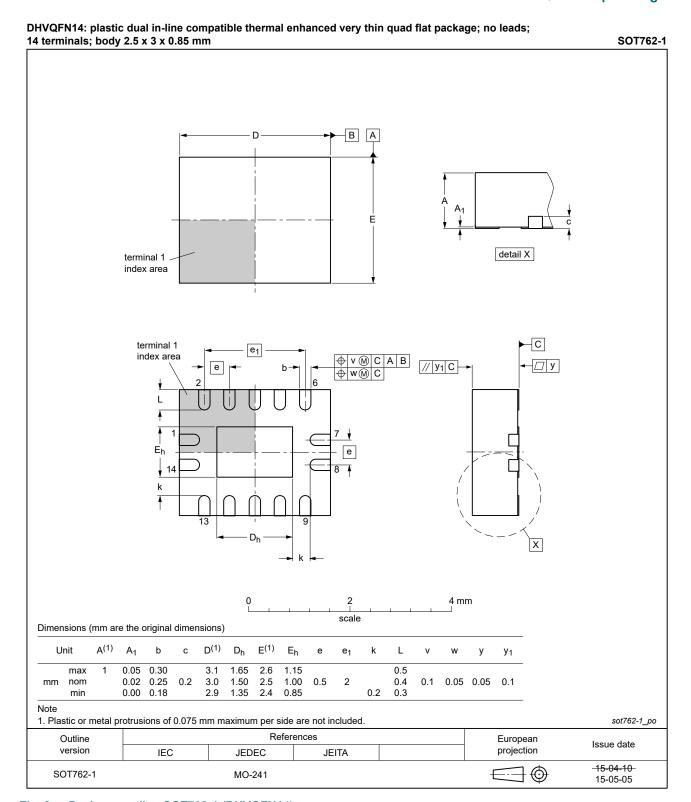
Package outline SOT762-1 (DHVQFN14)
